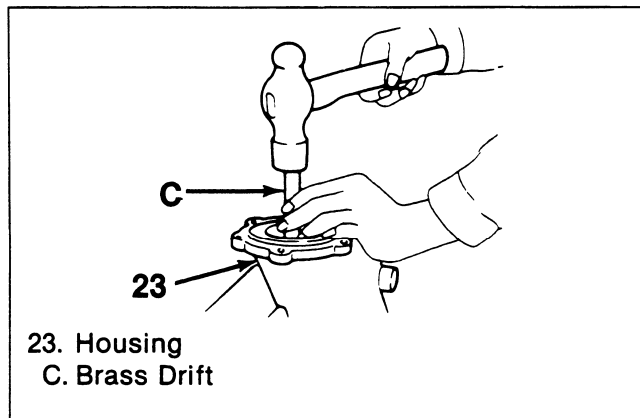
Removing Power Steering Pump Shaft Assembly From Housing
